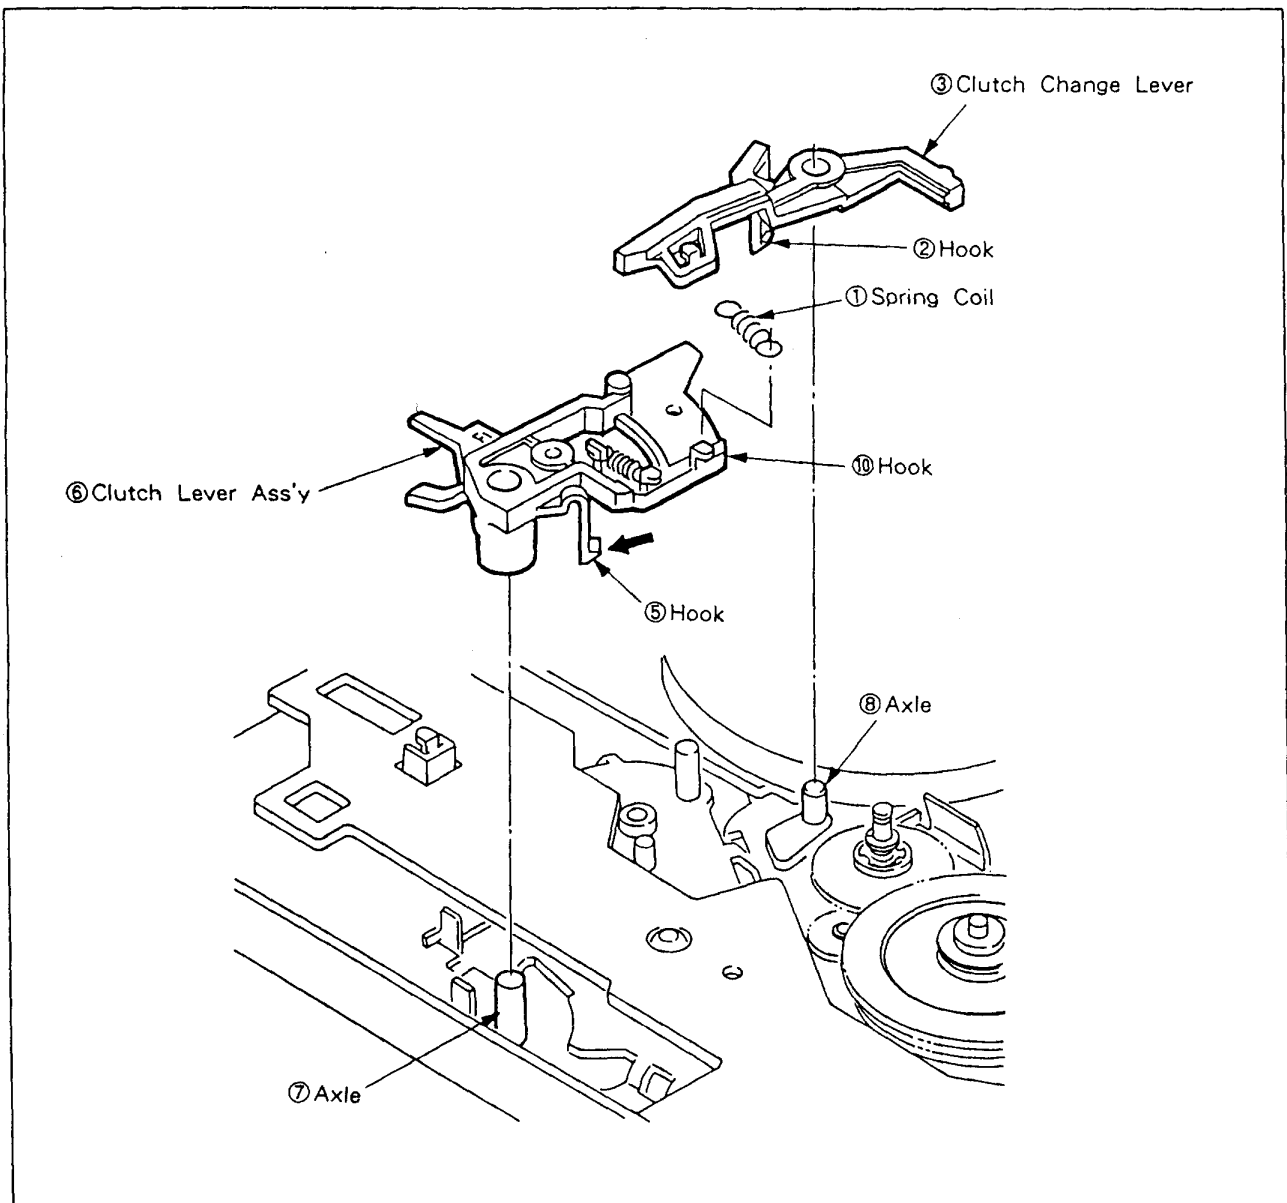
Clutch Change Lever & Clutch Lever Ass'y
